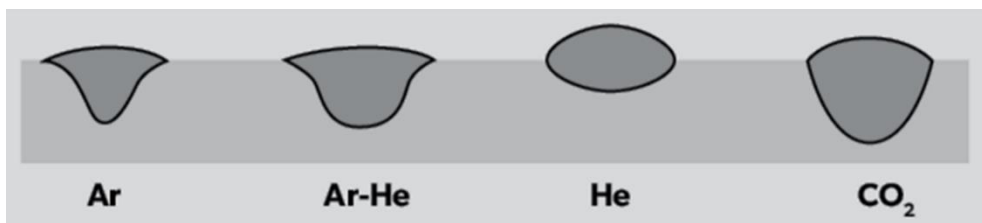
Effect of different shielding gases on weld pool shape [6]
